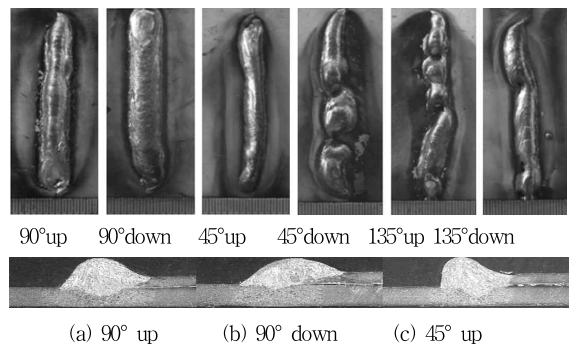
Bead shape of the vertical welding positions, respectively
